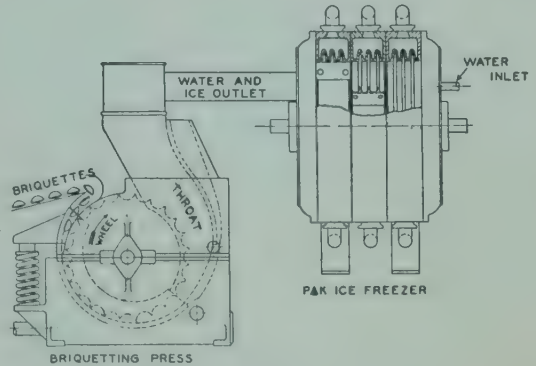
Pakice Machine (Right) and Briquette Maker.
